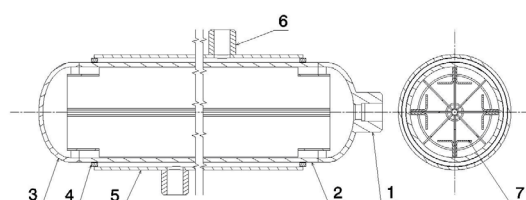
Design of the hydrogen storage pressure vessel. 1 – collar with the 1/4\"NPT thread; 2 – cylindrical part of the primary tank; 3 – elliptical bottom; 4 – flange for the outer shell; 5 – cylindrical part of the outer shell with the cooling fluid; 6 – G1/2 flange; 7 – internal heat transfer intensifier.
